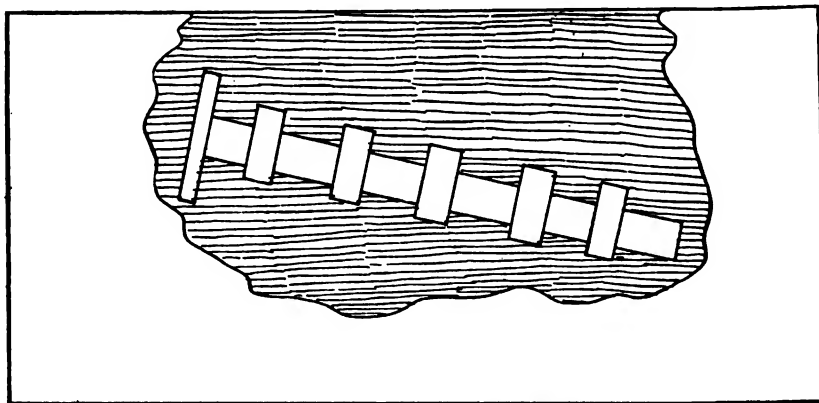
THE SHAFT WILL NOT REMAIN STRAIGHT IF QUENCHED CARELESSLY
